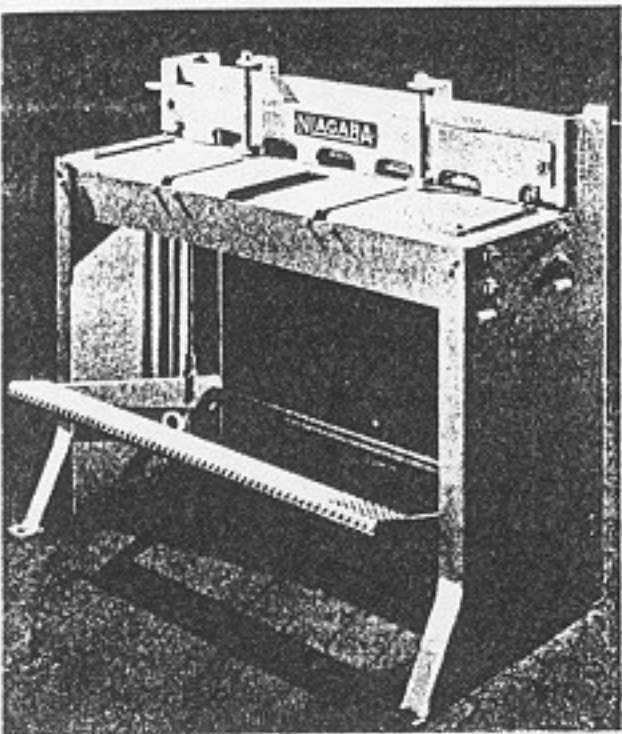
Squaring Shear. (Courtesy Niagara Machine and Tool Works.)
